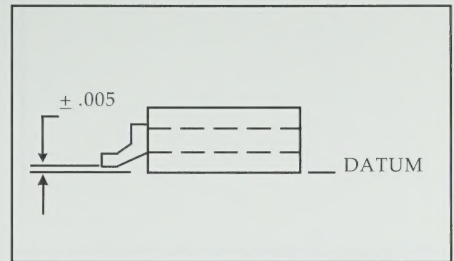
Surface Mount Tolerance for Components with Tabs
